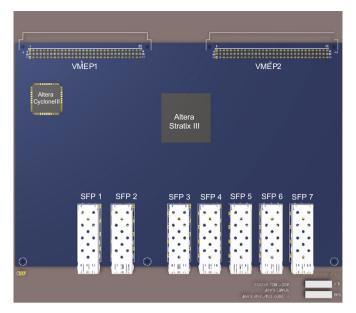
Elementary Readout Cell (ERC) prototype board PCB layout.
